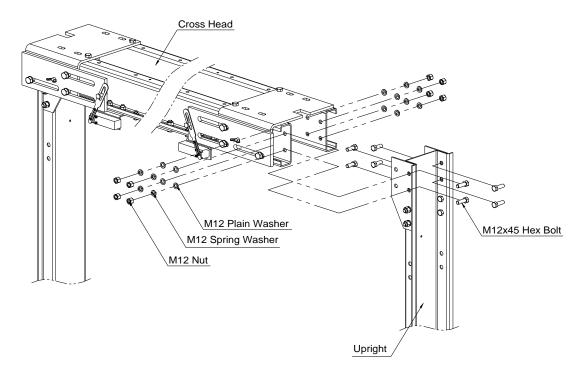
CROSSHEAD INSTALLATION (Underslung Fork type)
